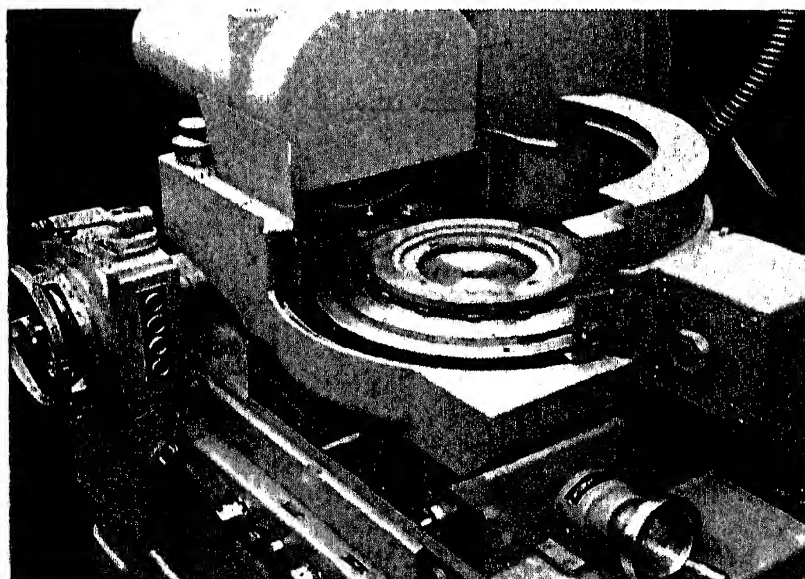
Surface grinder with a vertical spindle and reciprocating table.
